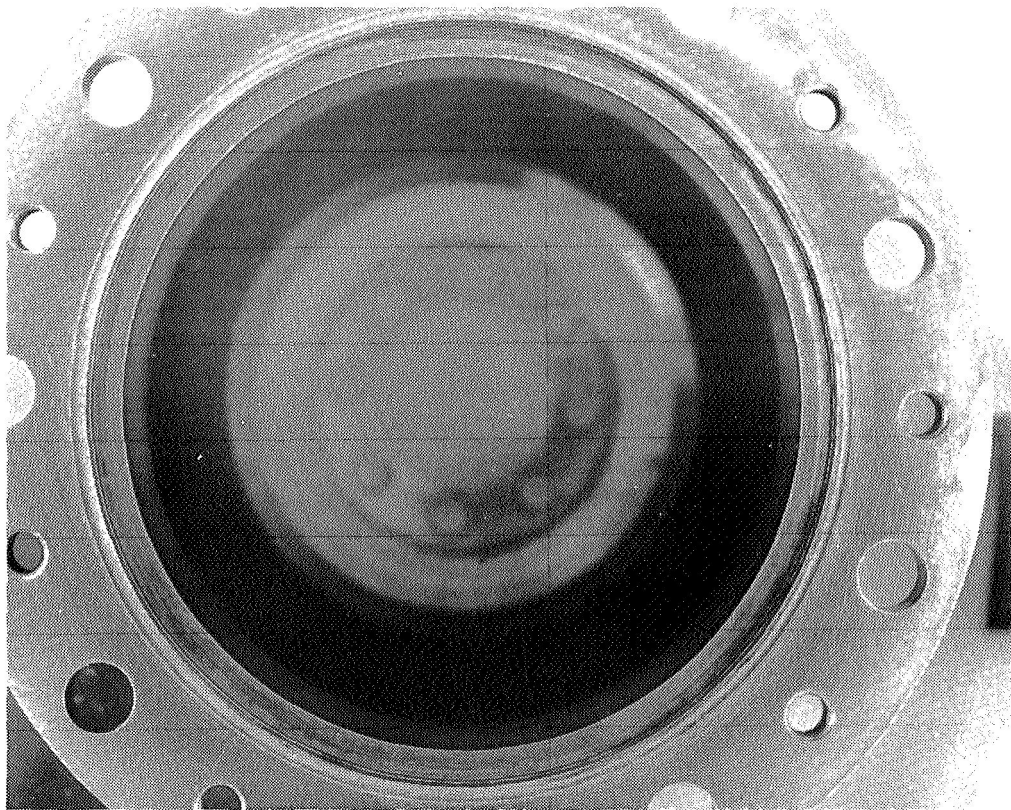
1 Valve Body Inlet Flange After Task III Testing
